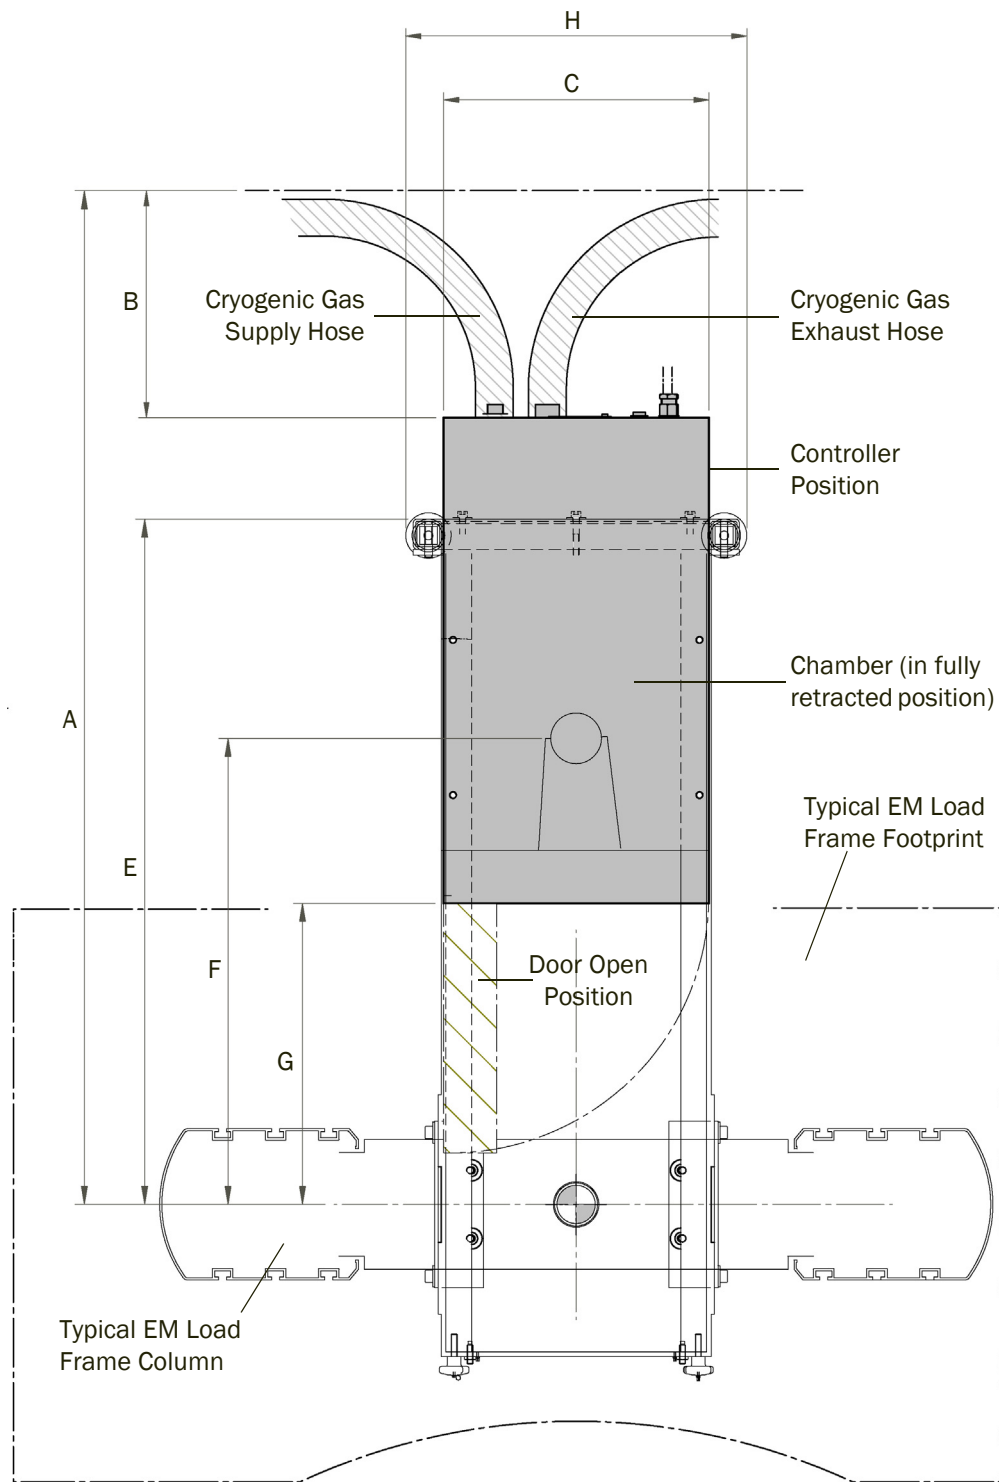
Plan View of Chamber with 3119-230 Roller Mount Assembly
